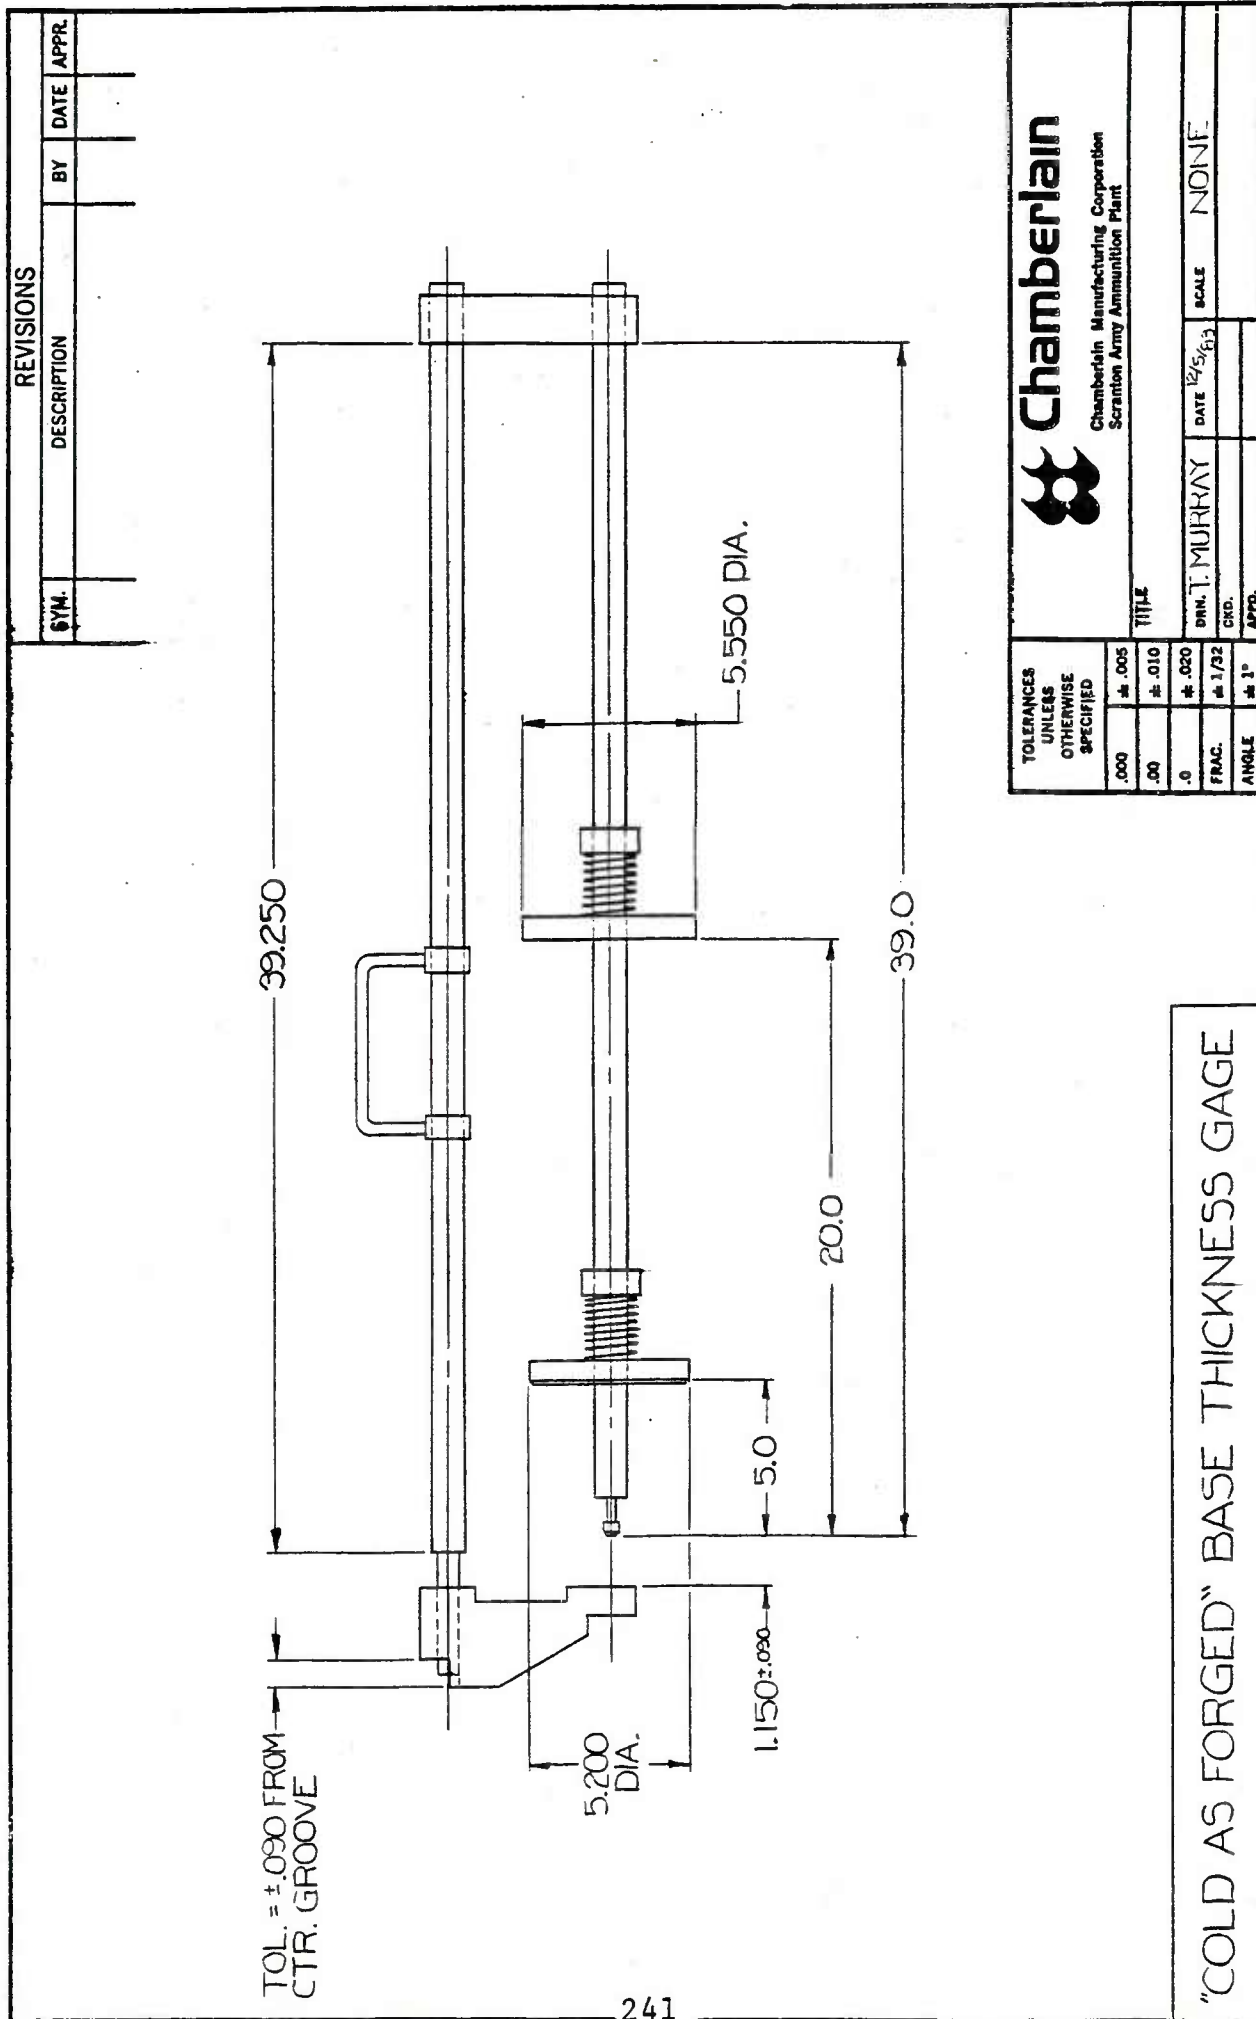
Base thickness gage utilized for the inspection of the "cold" forgings.
